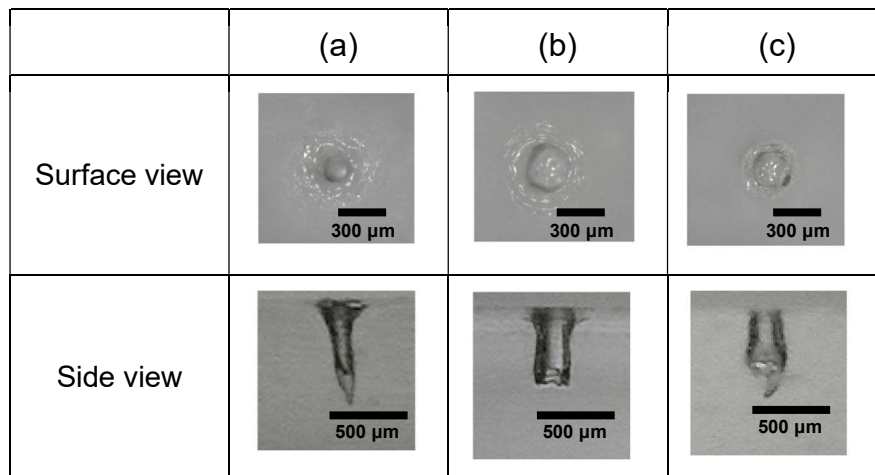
Sample hole shape images. (a) Conical hole. (b) Cylindrical hole. (c) Biconical hole.
